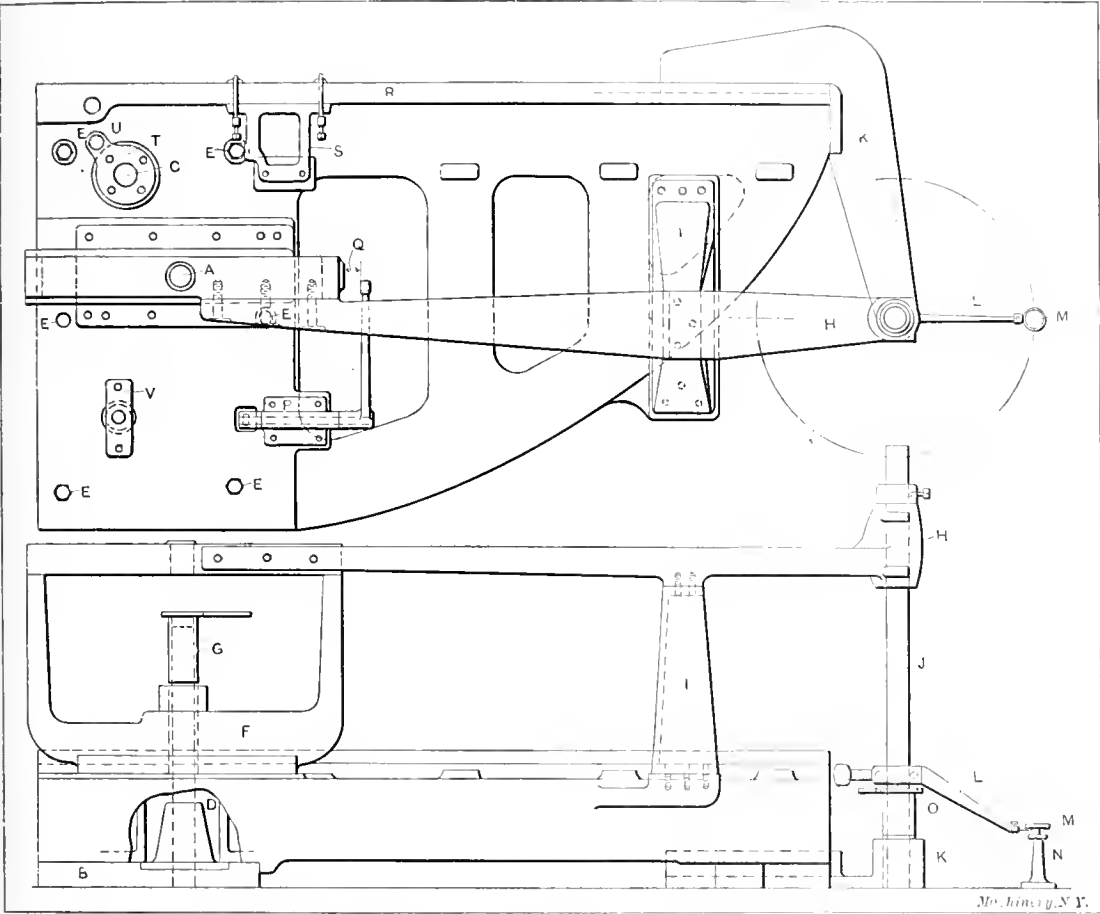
Method of Setting and Laying out Holes for the Driving and Feed Members on the Front Housing
